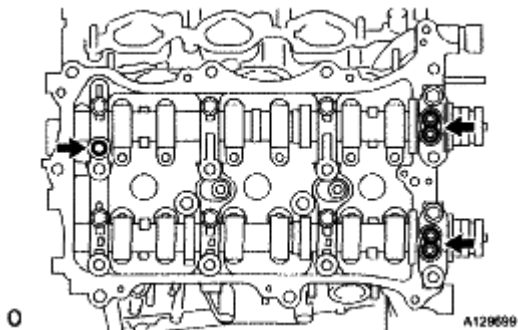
Locating Camshaft Bearing Cap Gaskets
